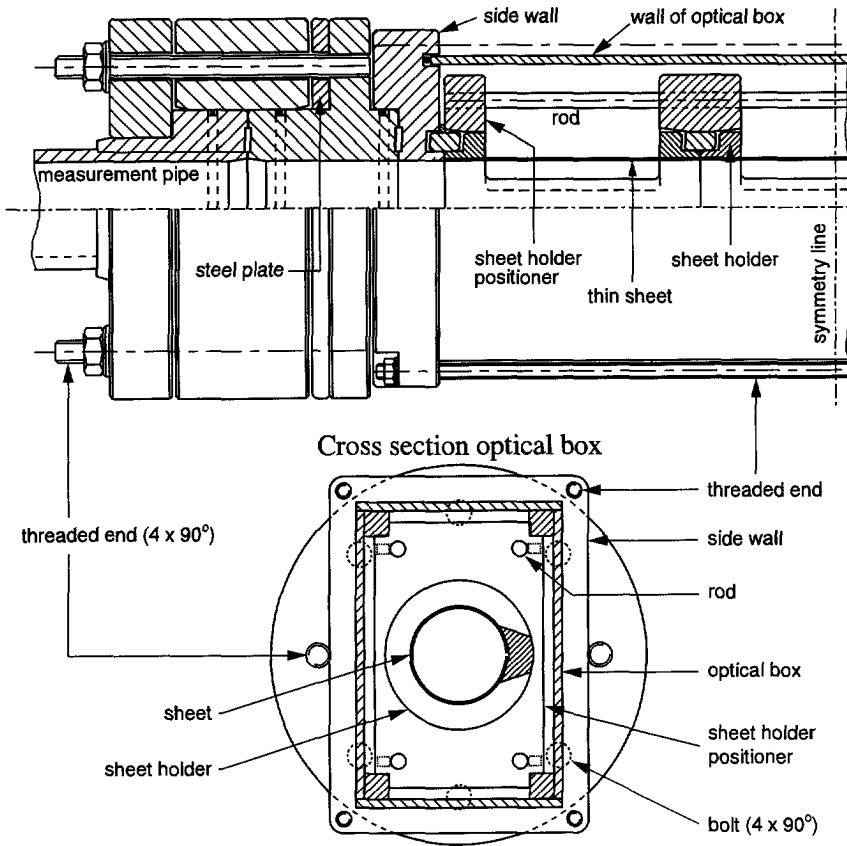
The second test section contains three sheet holders. Only half of the test section is drawn as it is completely symmetric. The top half is drawn as a cross section and the bottom half is an elevated view. The cross section of the optical box is located at the symmetry line, looking to the left. Note that the gap at the location of the seam is drawn only for reasons of clarity, and in practice the two ends touch.
